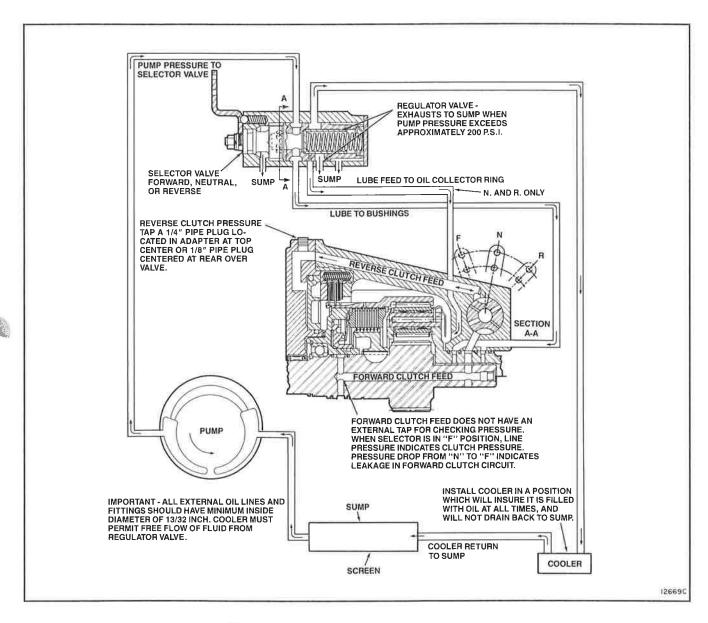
Hydraulic Circuit Schematic (Model 72C Direct-Drive Shown)
